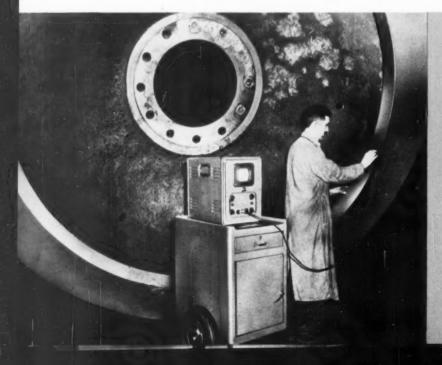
Large cast gear blanks having an outside diameter of 130 inches are tested to avoid cost of machining castings having internal defects.
